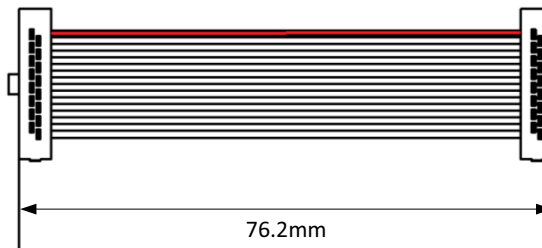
AS\_ETAF13.0 Debug Adapter
